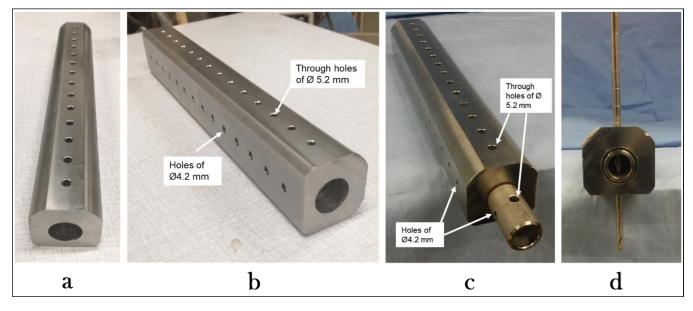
Guide illustration : a, b different parts of the guide, c the tube to be inserted into the guide; d shows the hole pass through the guide and steel tube.
